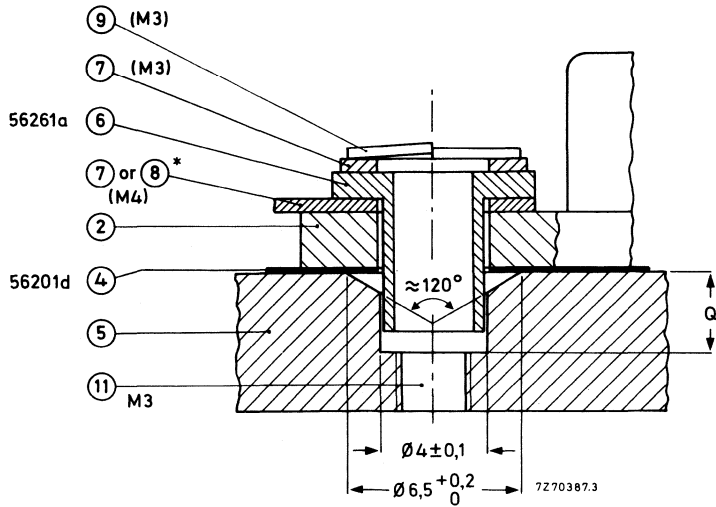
Assembly (partial) for Fig. 10 - tapped holes.
